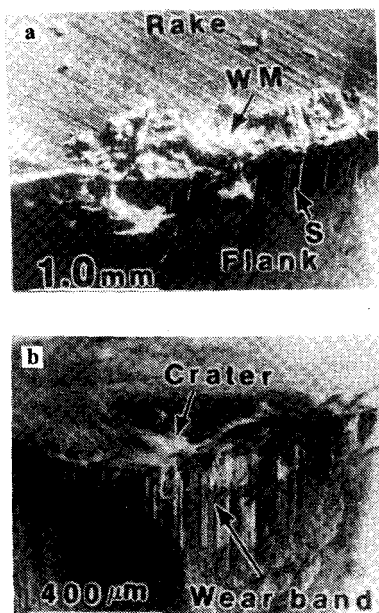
Composite tool after machining a) hardened steel (HRC 61-63) for a) 2 min. and b) 20 min. at 80m/min. cutting speed, 0.075mm/rev feed and 0.2mm depth of cut.
